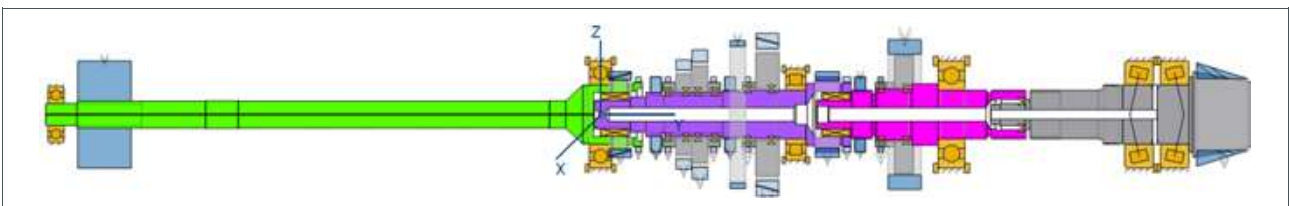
Typical shaft system where shafts are connected by pilot bearings. Modeling in KISSsoft shaft editor.
